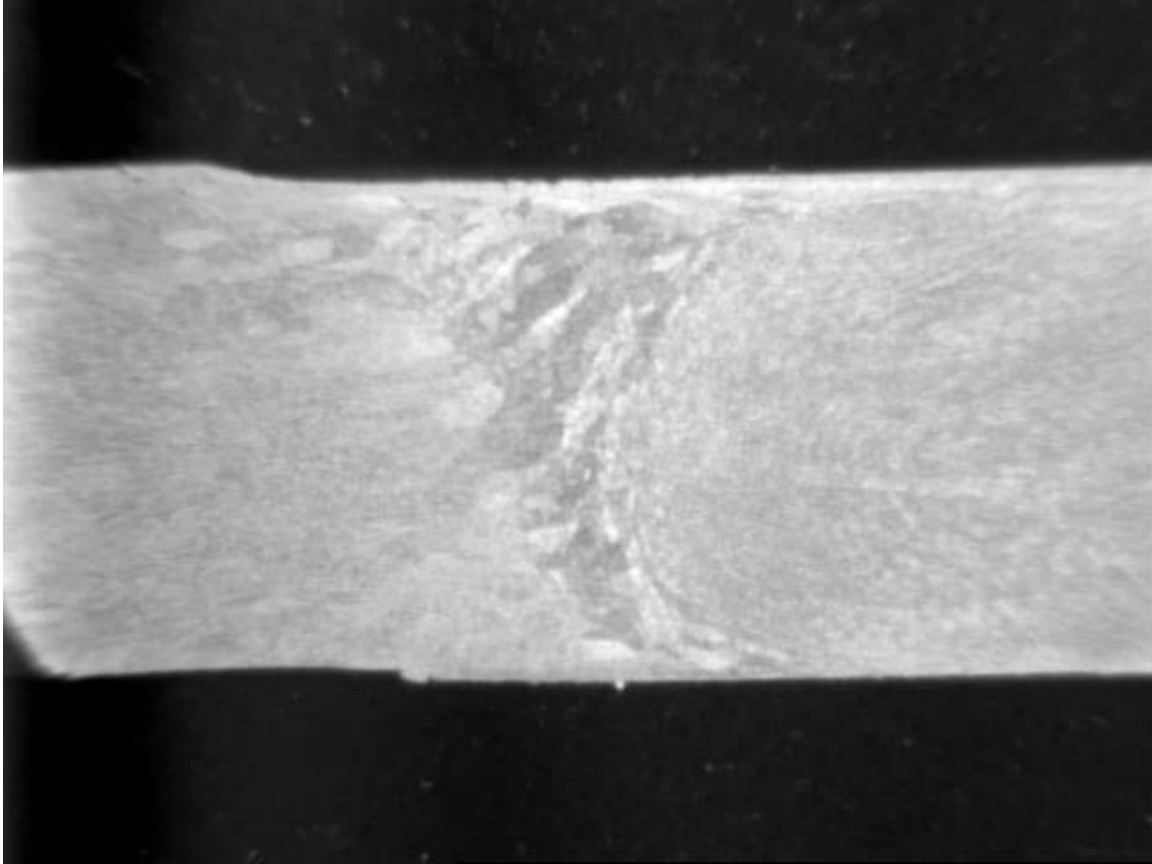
Zoom view of a macro taken from a wide probe weld (1400rpm, 5.2ipm). The retreating side of the weld is shown.
